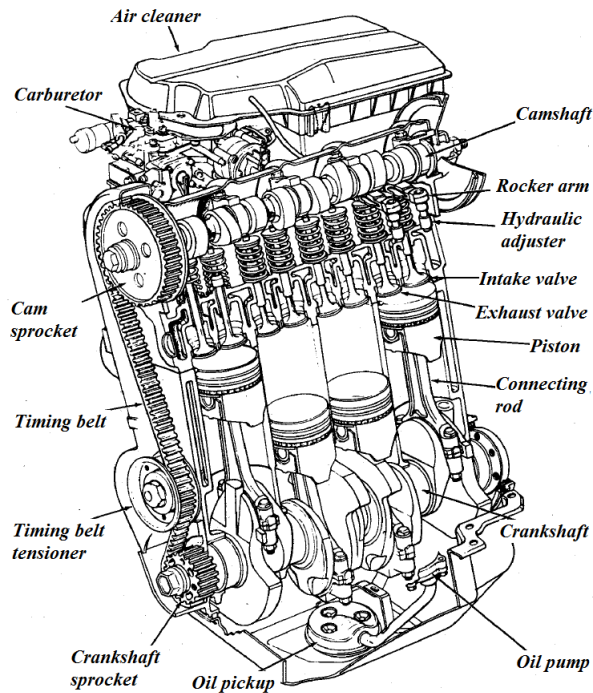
Cutaway drawing of a Chrysler 2.2-litre displacement four cylinder spark ignition engine [15].
